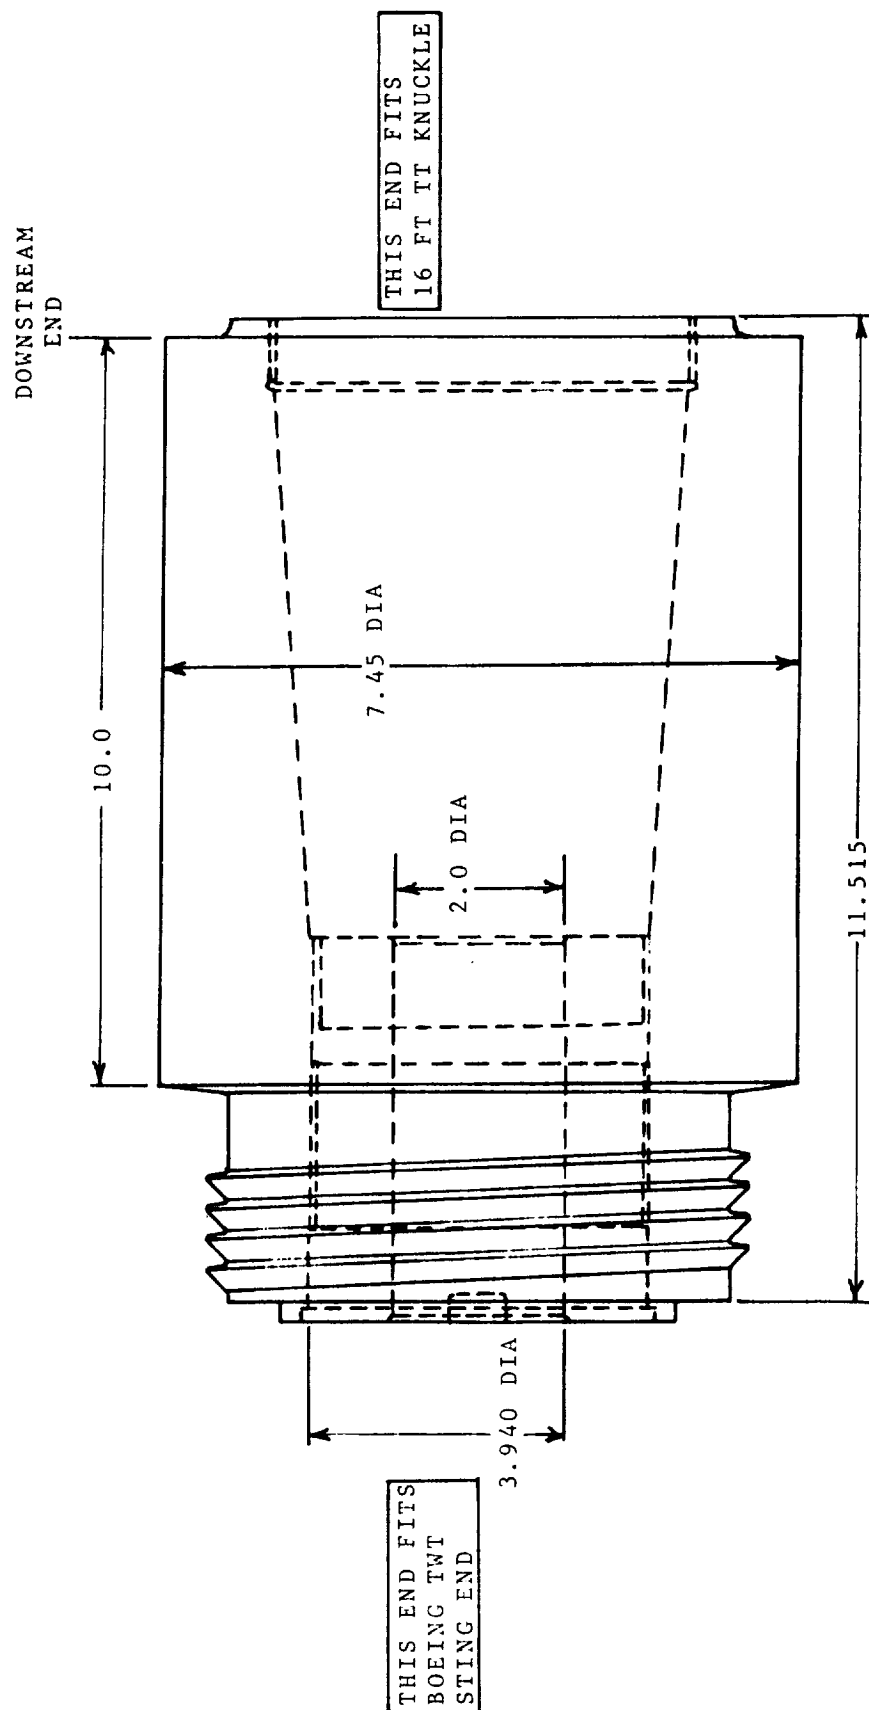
Sketch of adapter WTC 439 - 139. (All dimensions are in inches unless otherwise indicated.)
